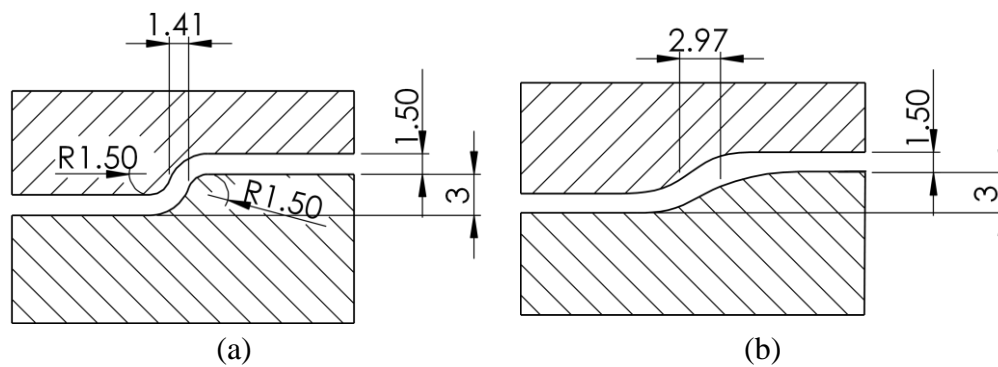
Sectional view of the drawbead geometry in zone 3 (a) before and (b) after die tryout.
